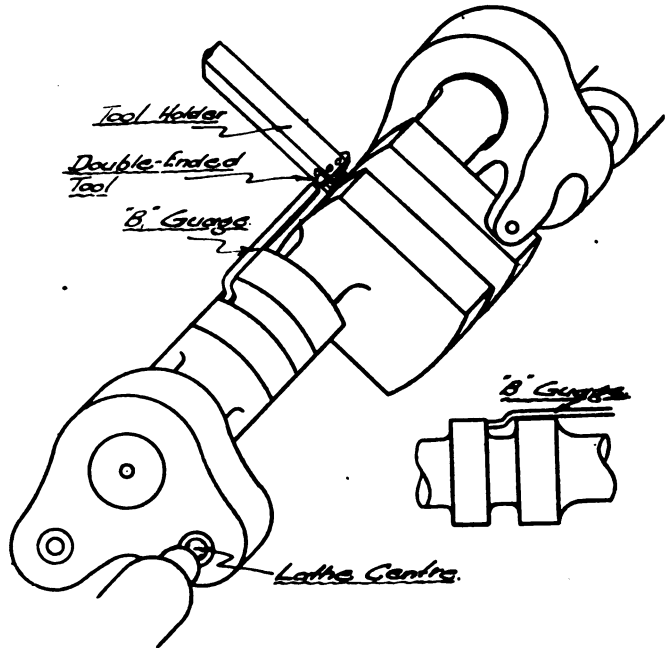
METHOD OF SETTING THE DOUBLE-ENDED TOOL OFF THE FINISHED CRANK WITH THE "B" GAUGE.
